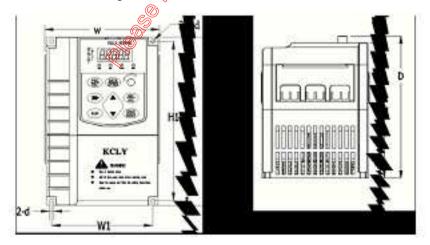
Appearance and installation dimension scheme of 0.75~15KW inverter
